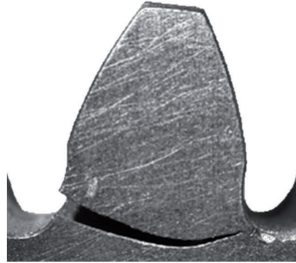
Fatigue crack in a gear's tooth root; [54].
